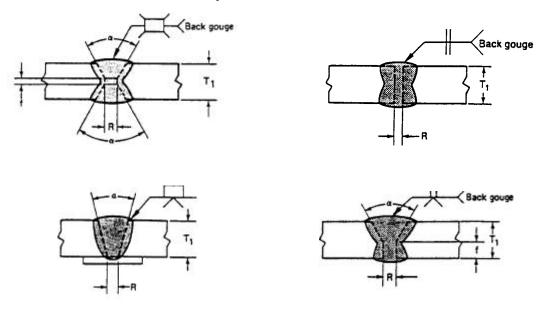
, C-1 – Prequalified complete joint penetration groove welded joints
